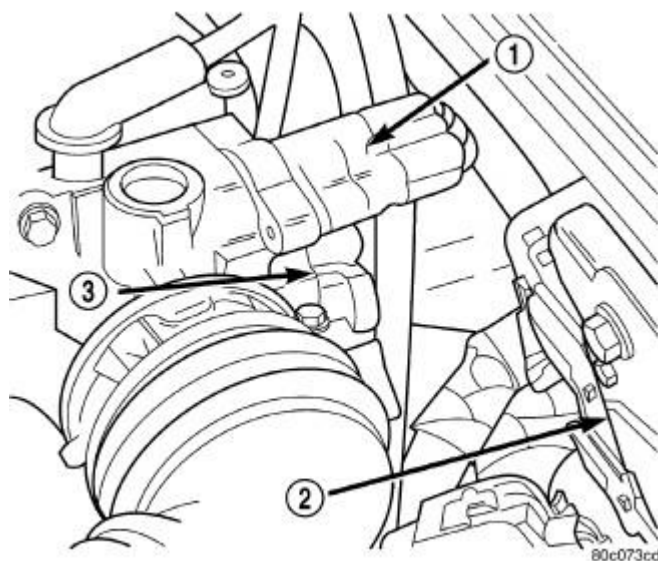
Idle Air Control (IAC) Motor and Throttle Position Sensor (TPS) Wiring Connectors
